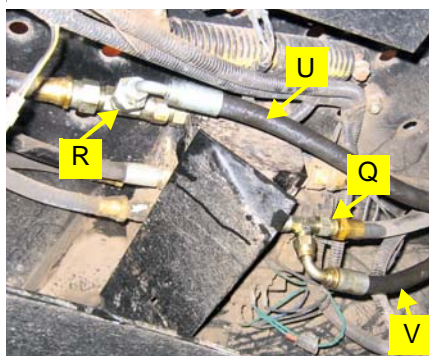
Installed pressure and tank hose at hydraulic valve.
